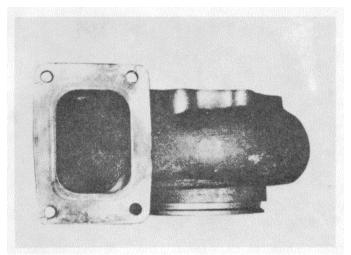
L-20. Cracks in the Turbine Housing Mounting Flange
